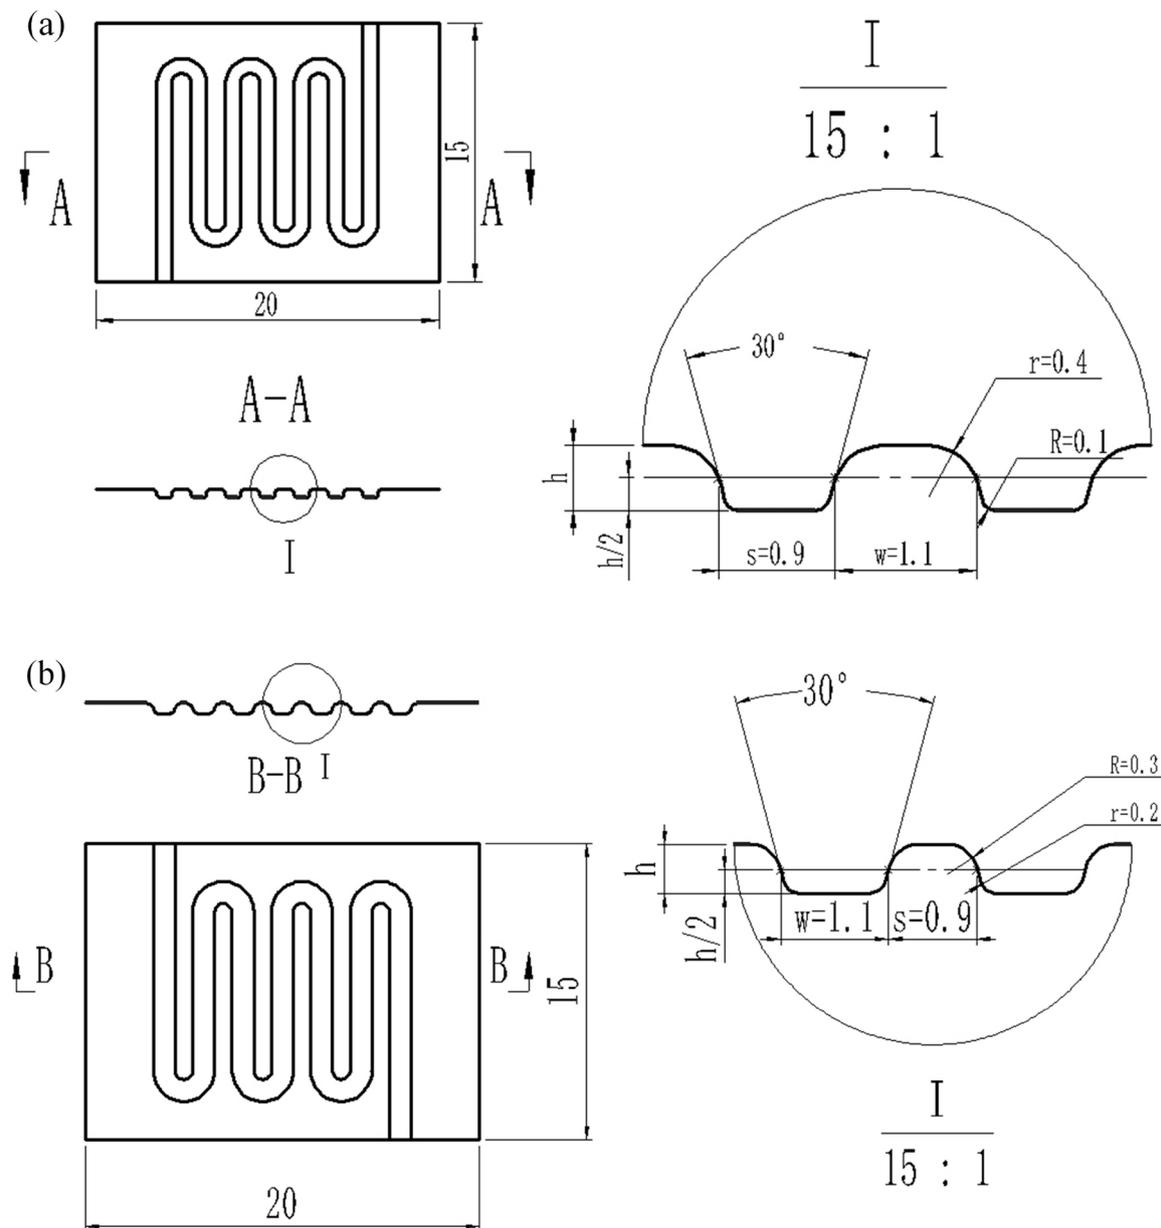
Schematic of the mold dimensions: (a) Convex mold; (b) Concave mold.
